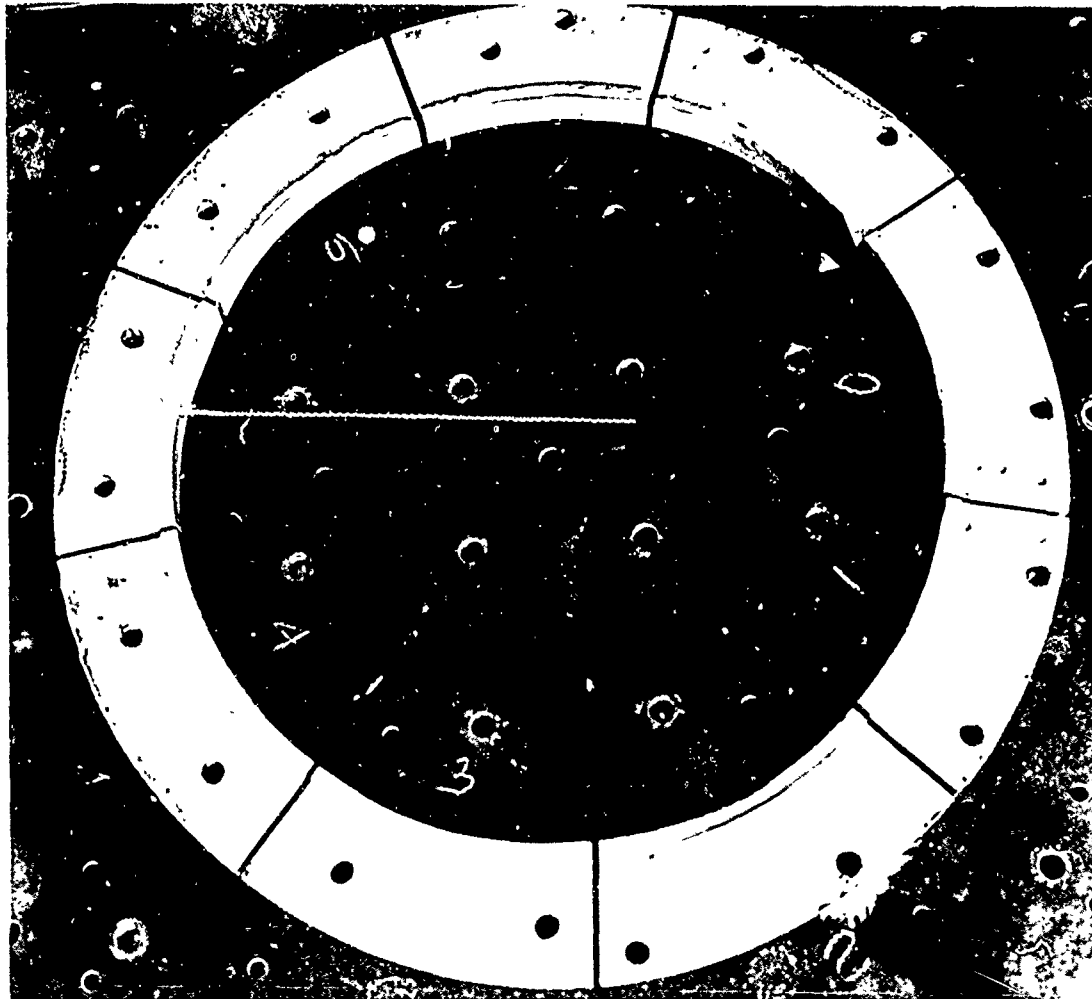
The chock pads of Test Structure No. 2 after completion of shock and vibration tests. The corner of Pad 8 spalled off on Blow 8, one of the extra blows with hold-down bolts loosened. No additional damage was caused by Blow 9.
